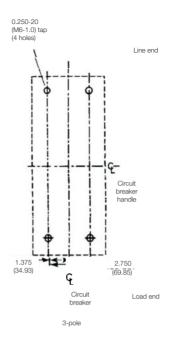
3-pole circuit breaker mounting bolt drilling plans
